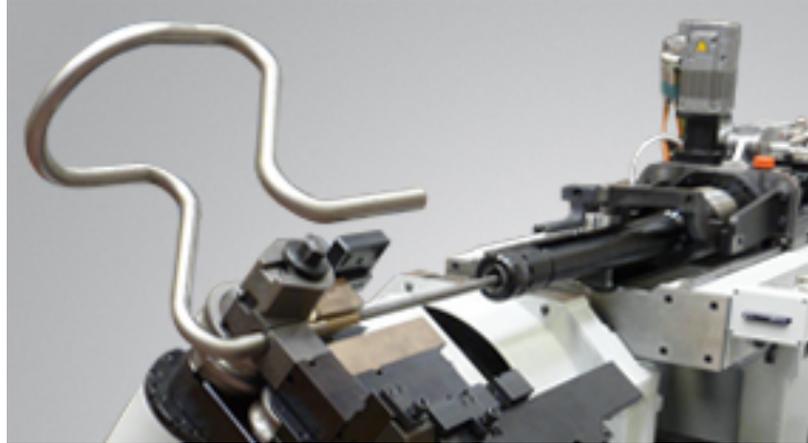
Typical rotary tube bending machine (courtesy BLM Group)
